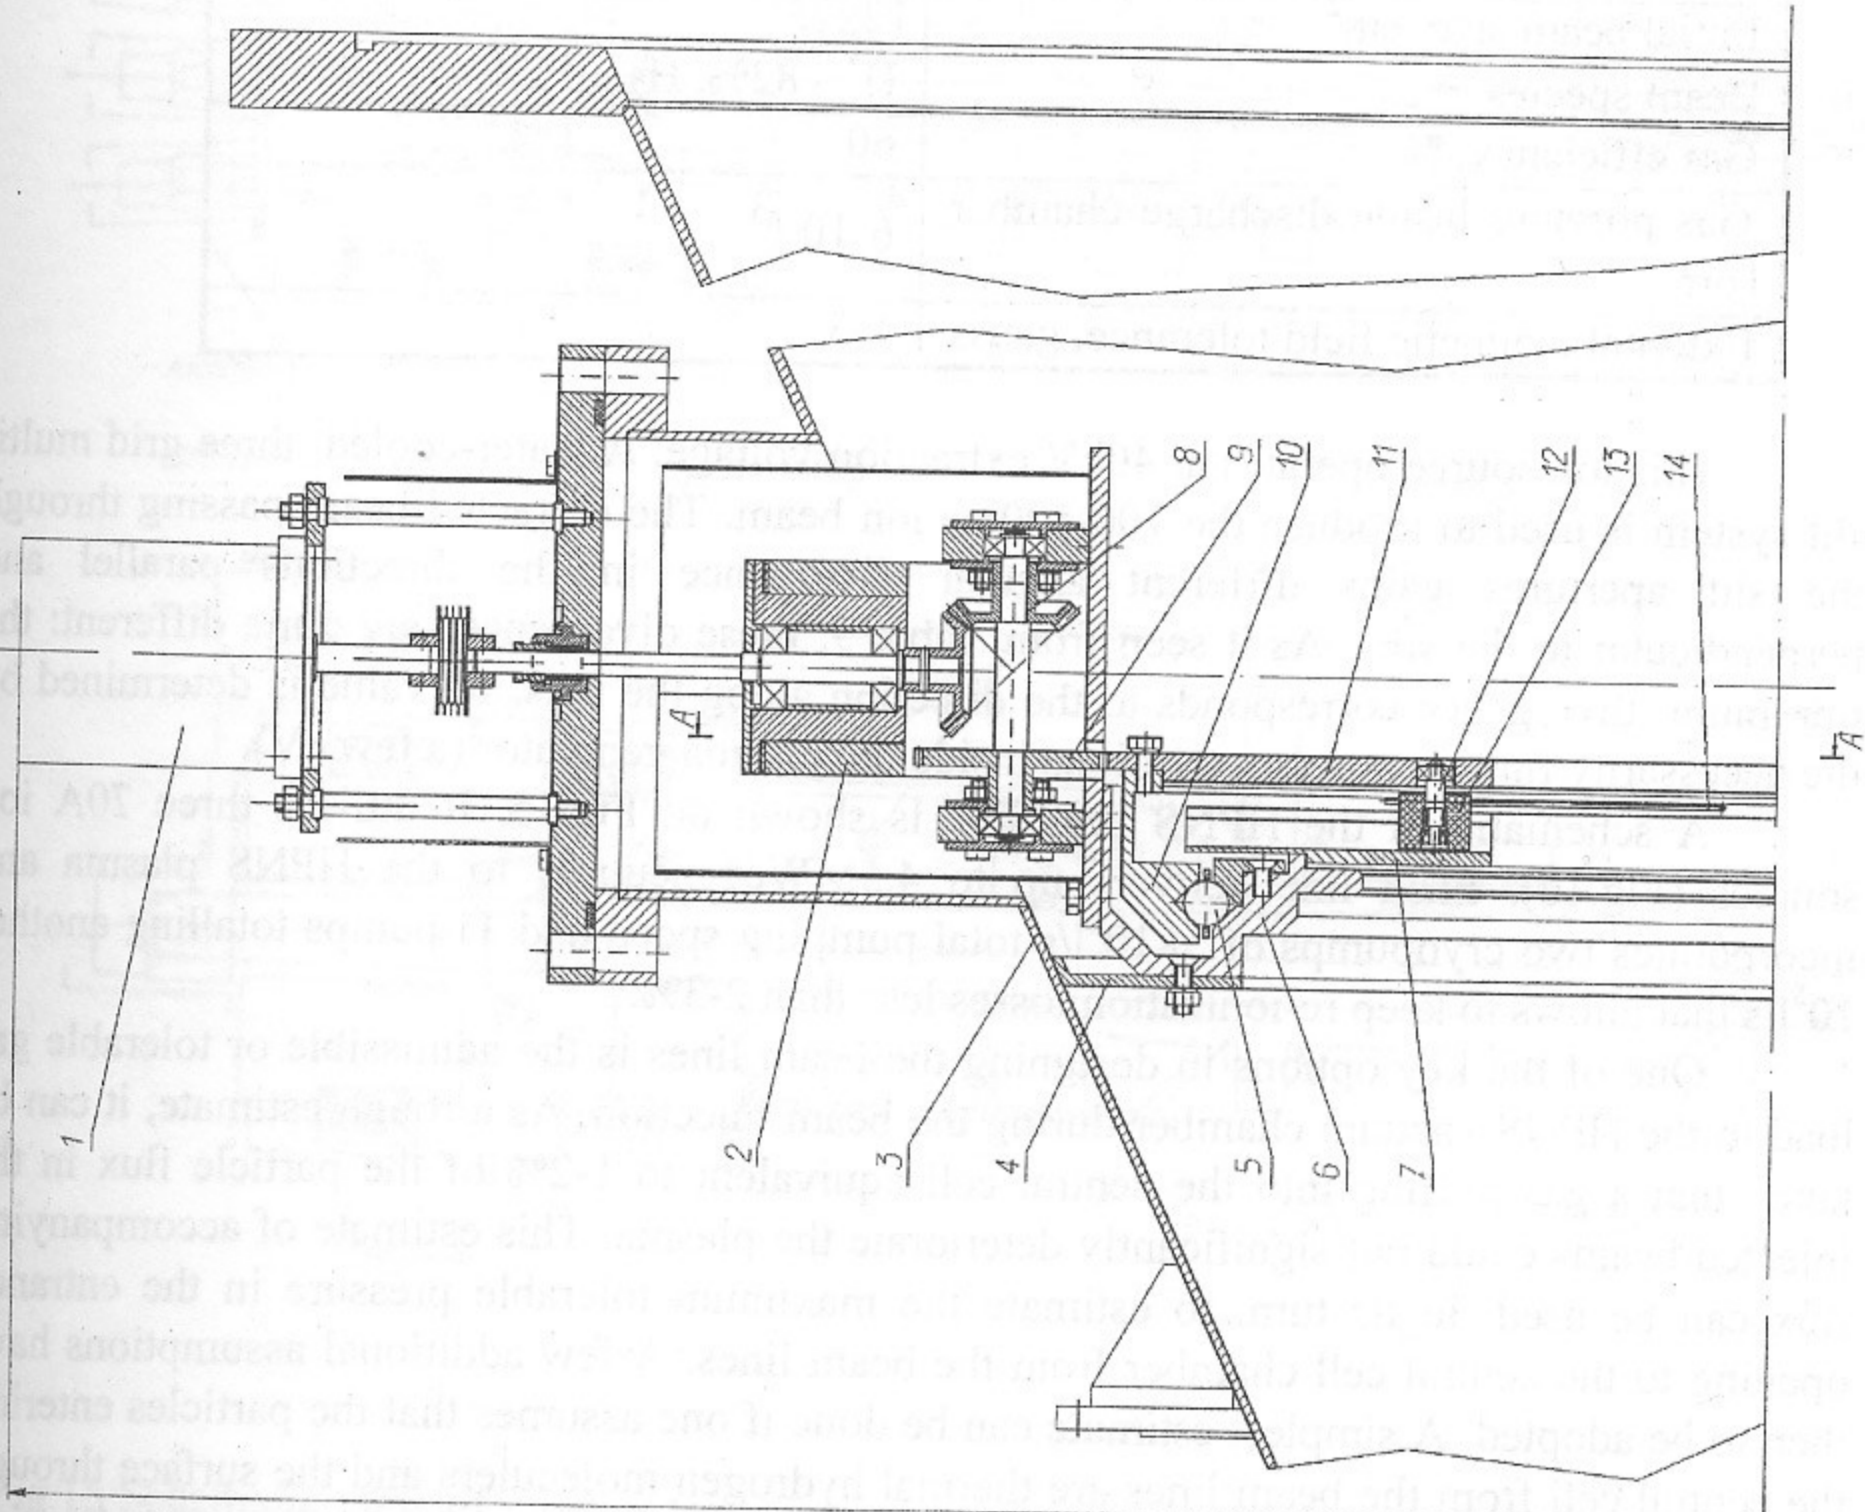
Evacuated view (90° rotated cut-away view of the pivoting end plate segment)
